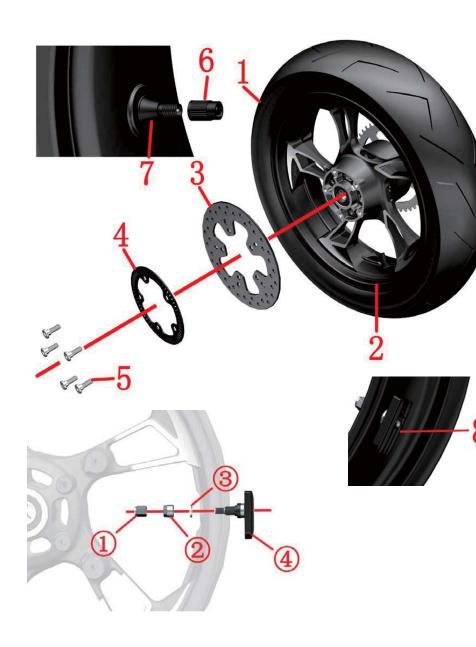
REAR WHELL COMPONENT		Rear wheel component 2	СНК	(0)
